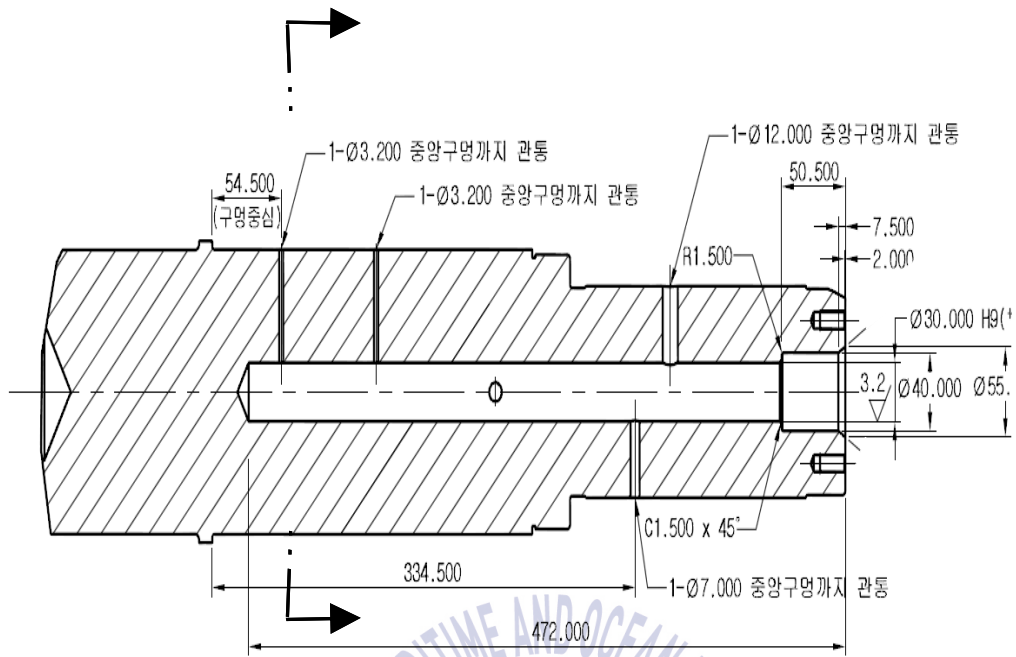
Oil holes of clutch control and cooling⁵⁾
